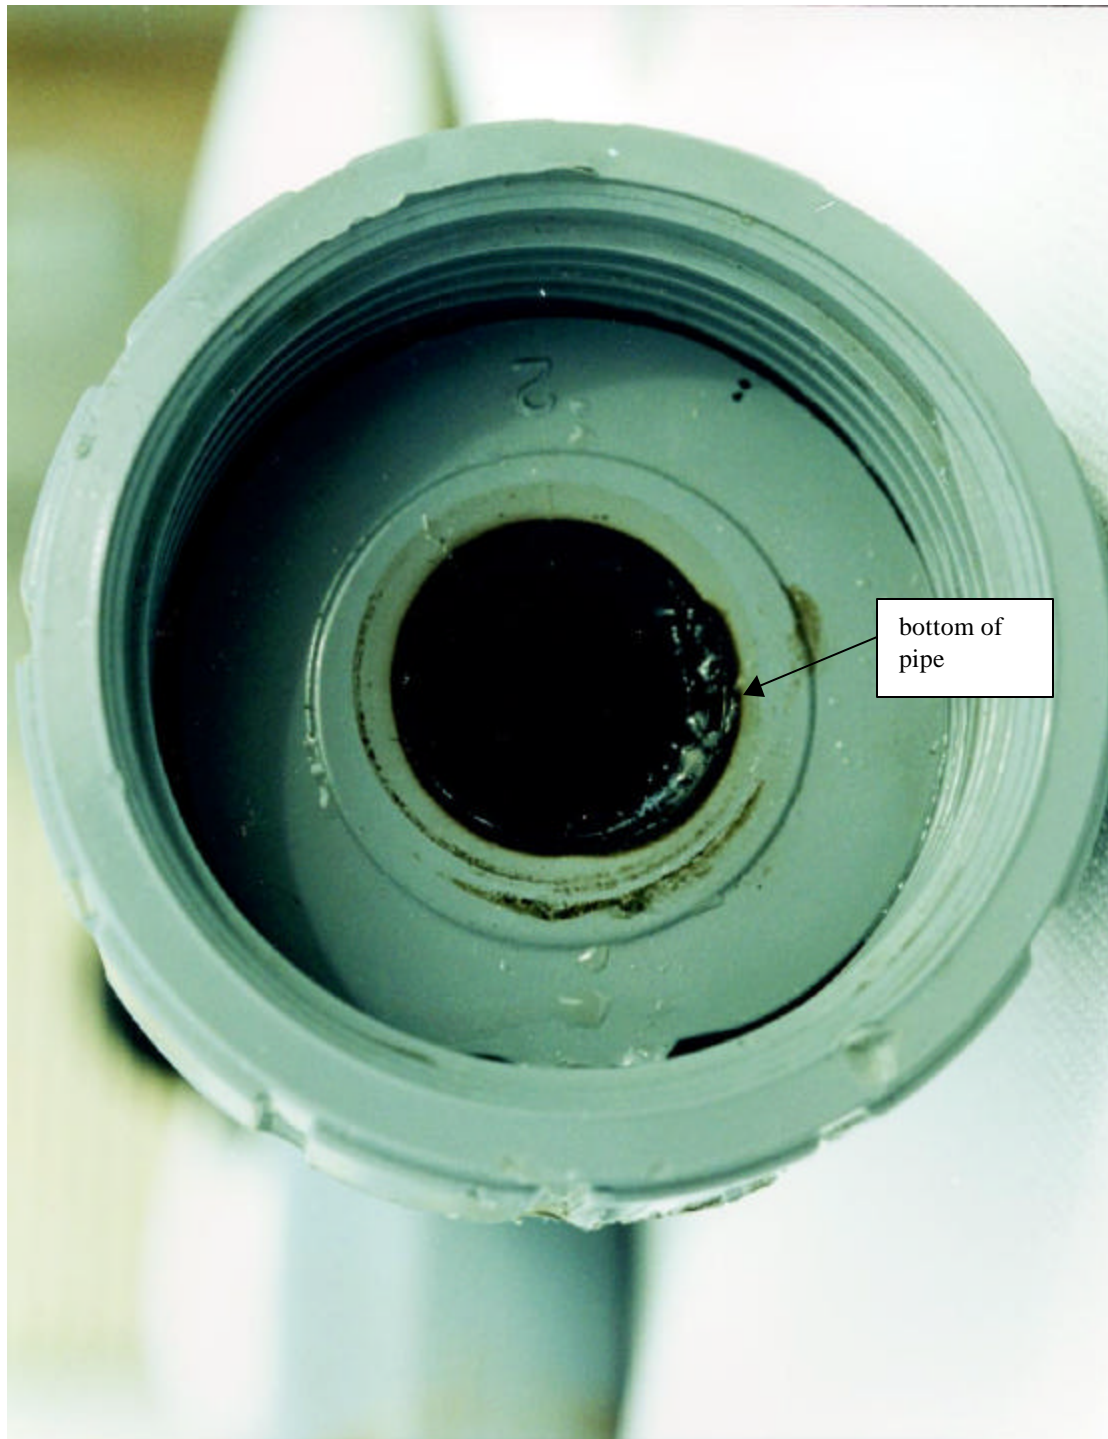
Photograph of the opposite end of the assembly (valve fitting)
